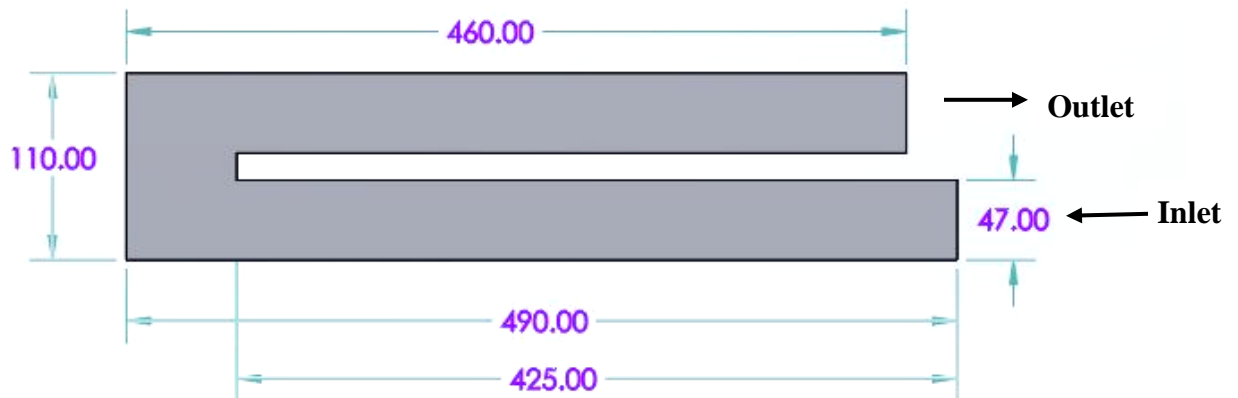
Dimensions of the cooling channel (all dimensions are in mm)
